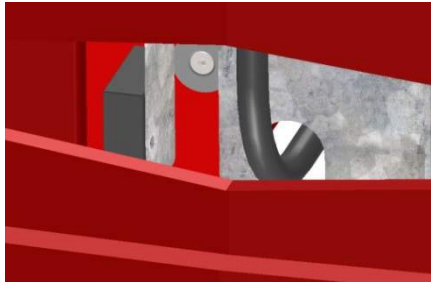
Inner bottom view. Hydraulic hose passing through the bracket
